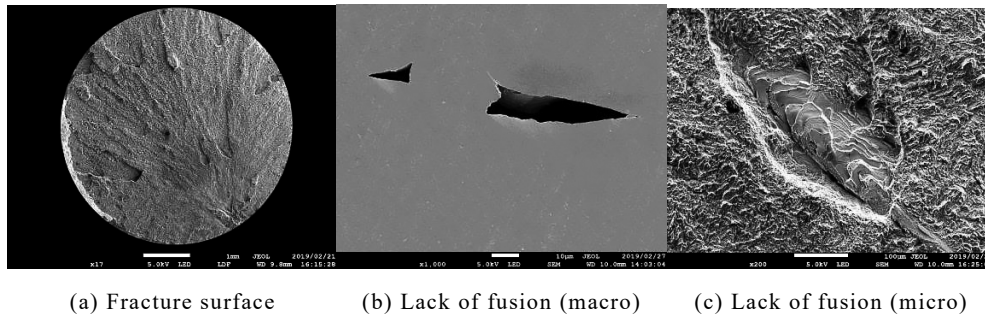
Fracture surface after tensile test of the as-built specimen fabricated at 90° direction. (a) Fracture surface (b) Lack of fusion (macro) (c) Lack of fusion (micro).
